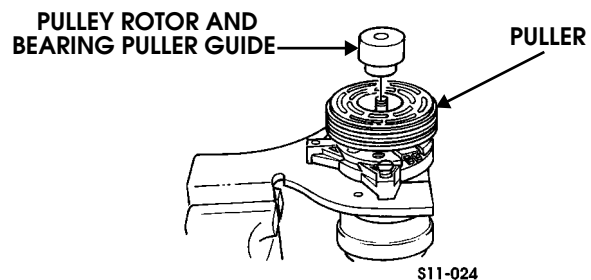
Pulley Rotor and Bearing Puller Guide
